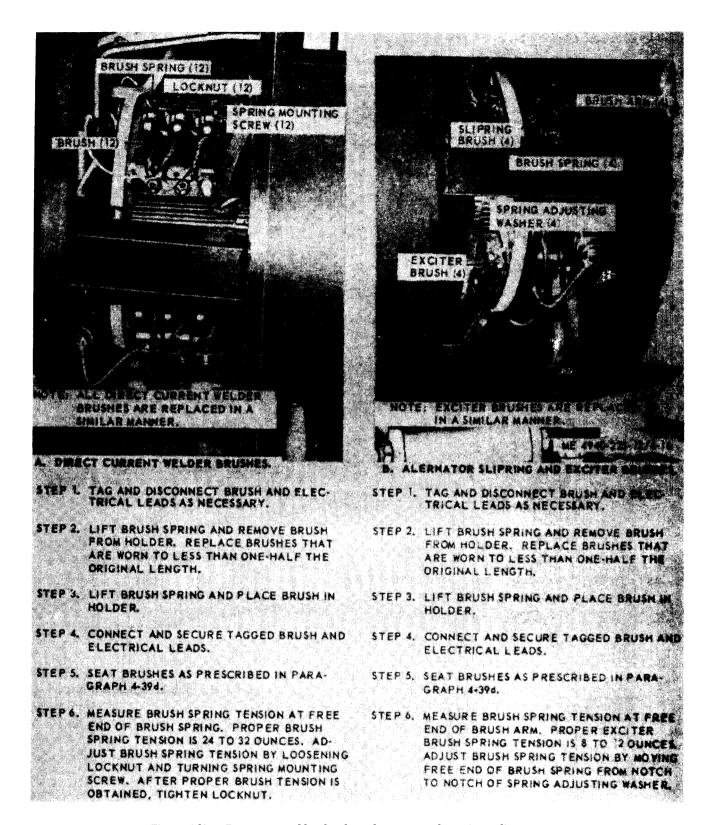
Dynamotor-welder brush replacement and tension adjustment.
